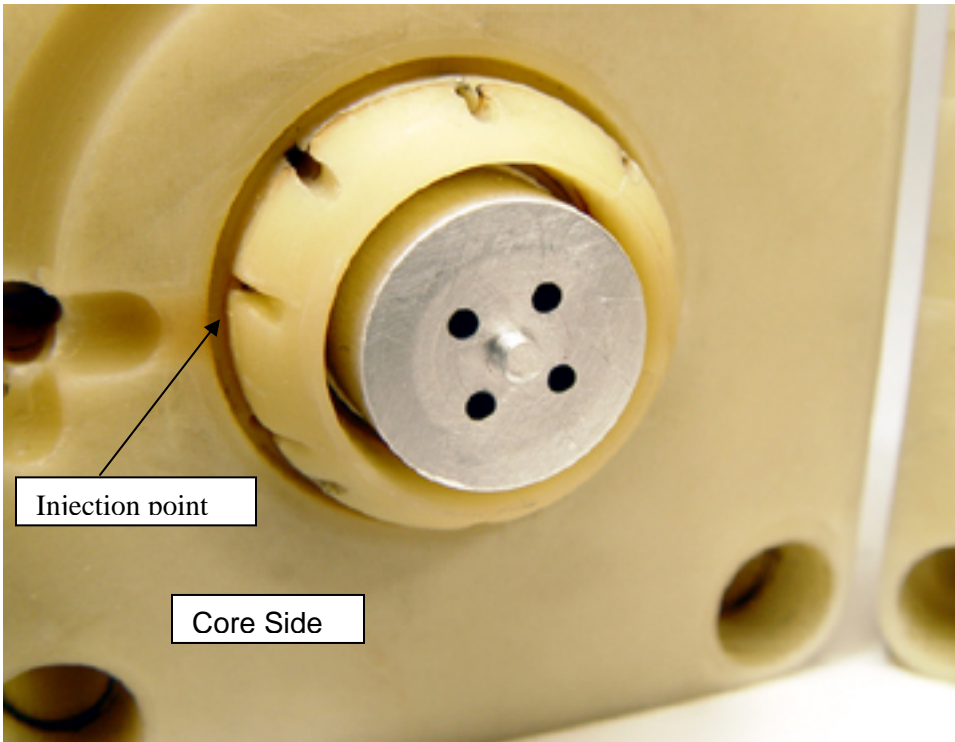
Ceramic SL insert - core side showing machined aluminum insert
